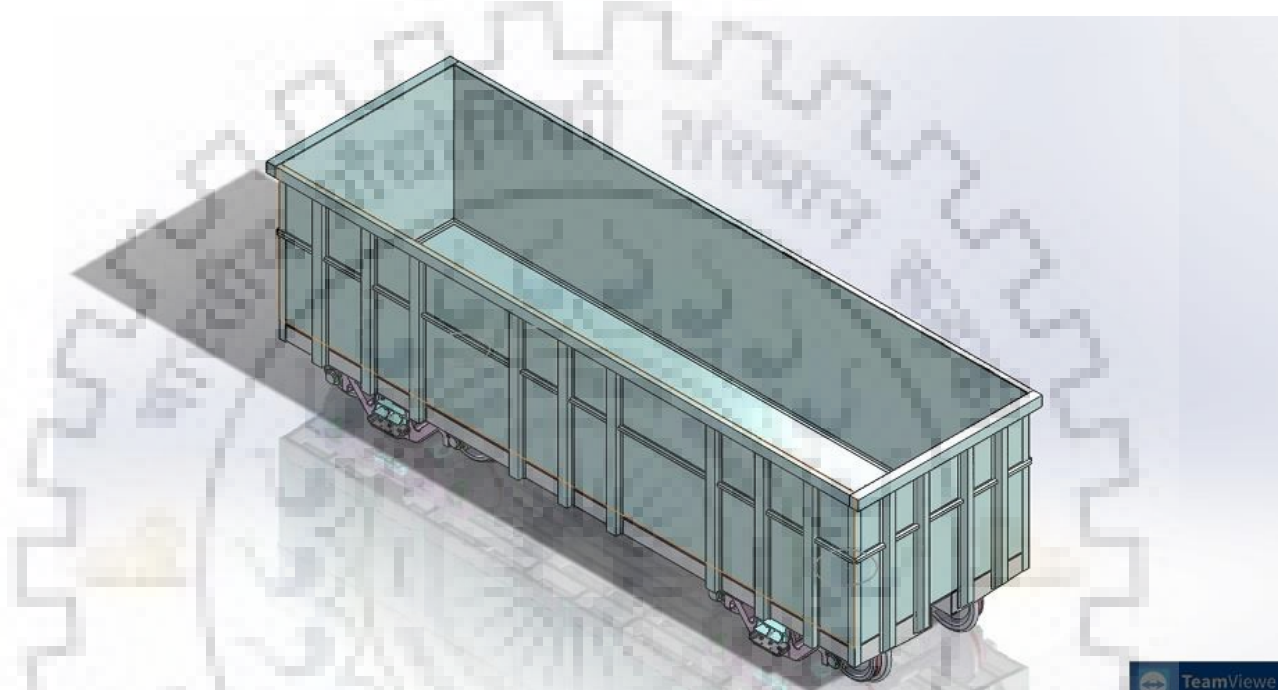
Assembly of BOXN 25 Wagon and a pair of CASNUB bogies.
